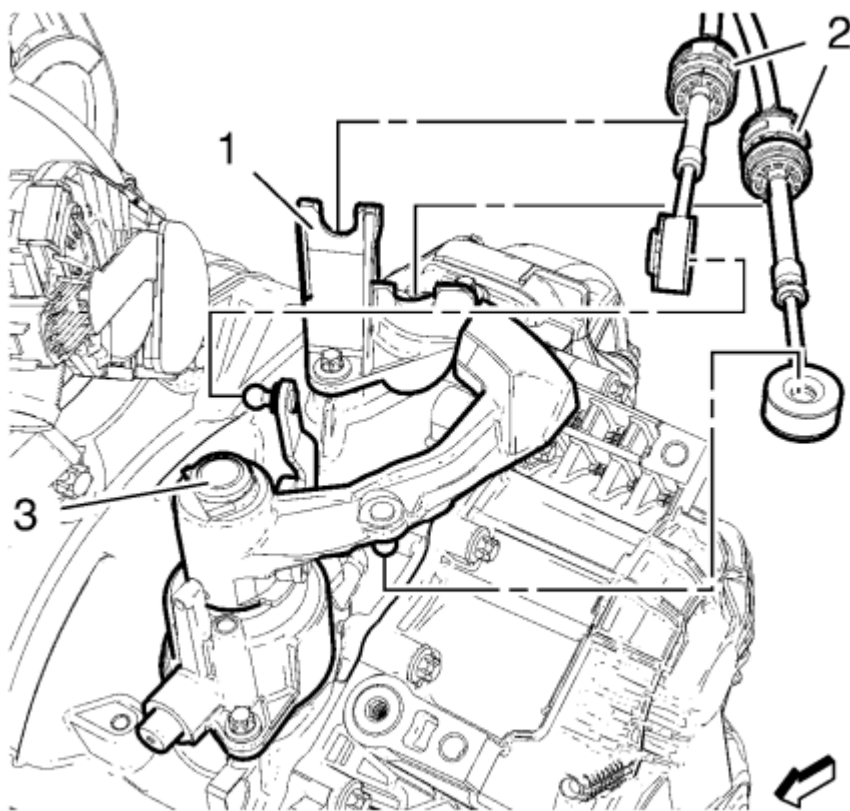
Selector Lever Cable, Bracket And Transmission Control Housing
